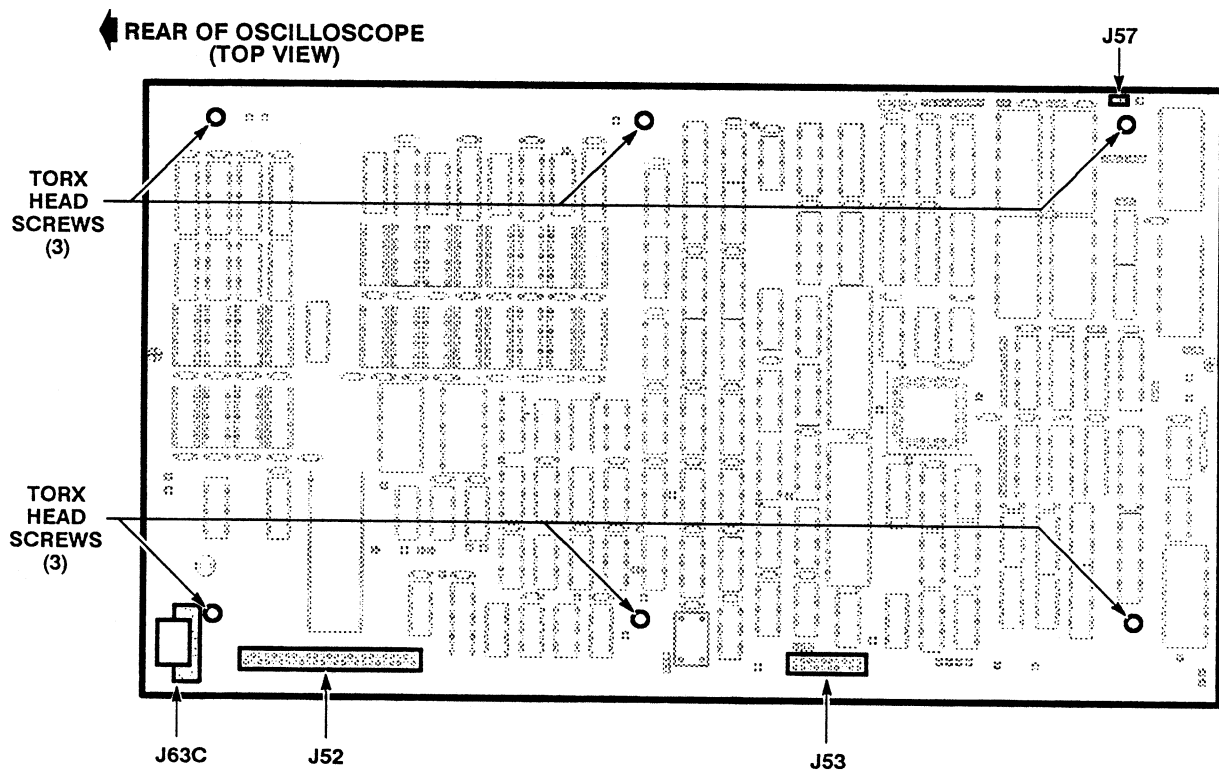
Removing and Replacing the A7 Display Controller Board
